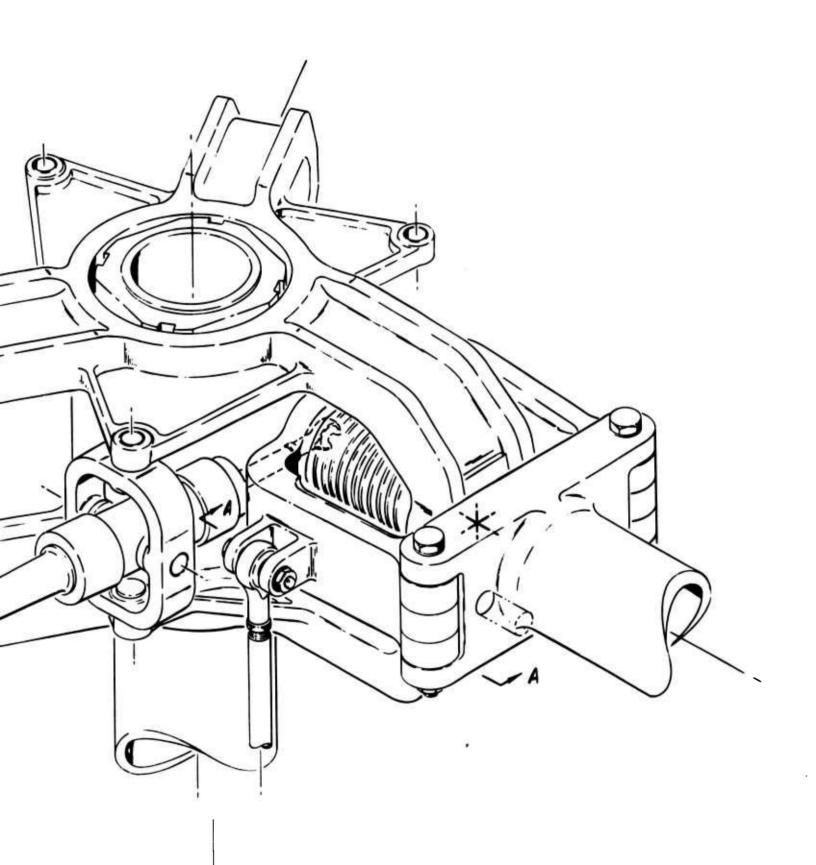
Coincident-Hinge Elastomeric Bearing Rotor Hub. (Sheet 1 of 2)
